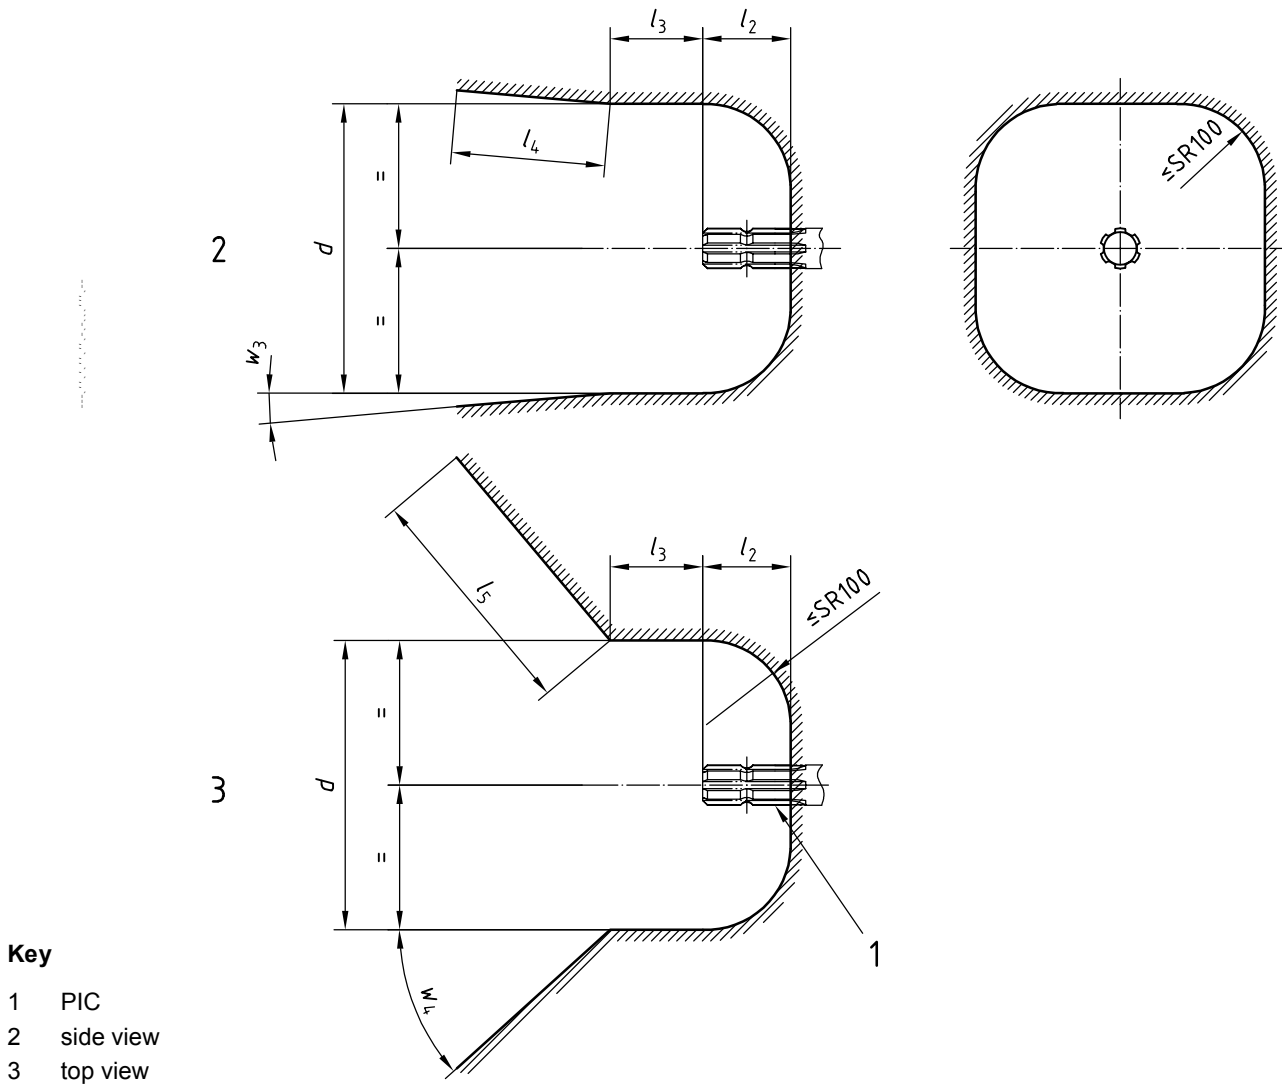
Minimum PTO drive-line clearance envelope at PIC for drawbar attachment
